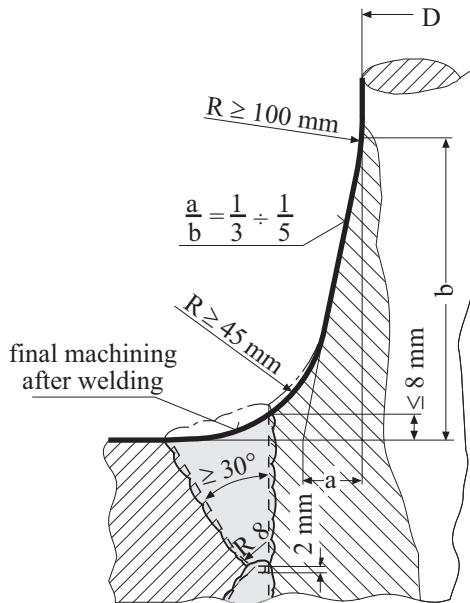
Welded joint between rudder stock and coupling flange
